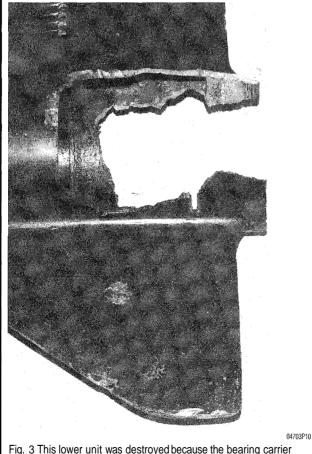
This lower unit was destroyed because the bearing carrier was frozen due to lack of lubrication
